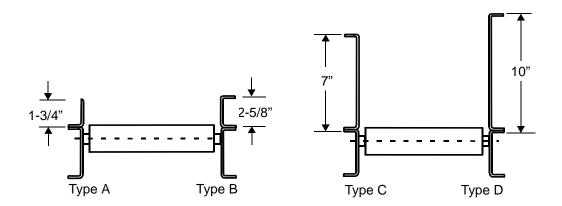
Types of Fixed Side Guides, shown attached to conveyors
